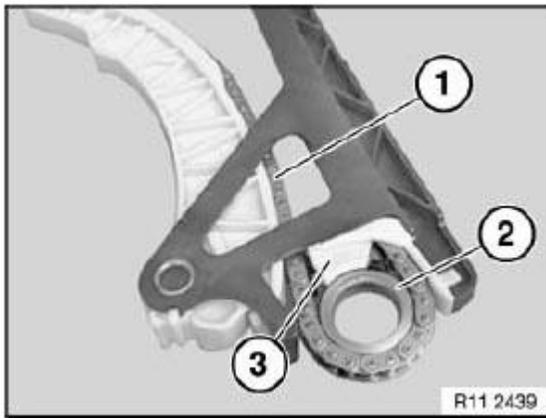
Identifying Timing Chain And Sprocket Wheel
